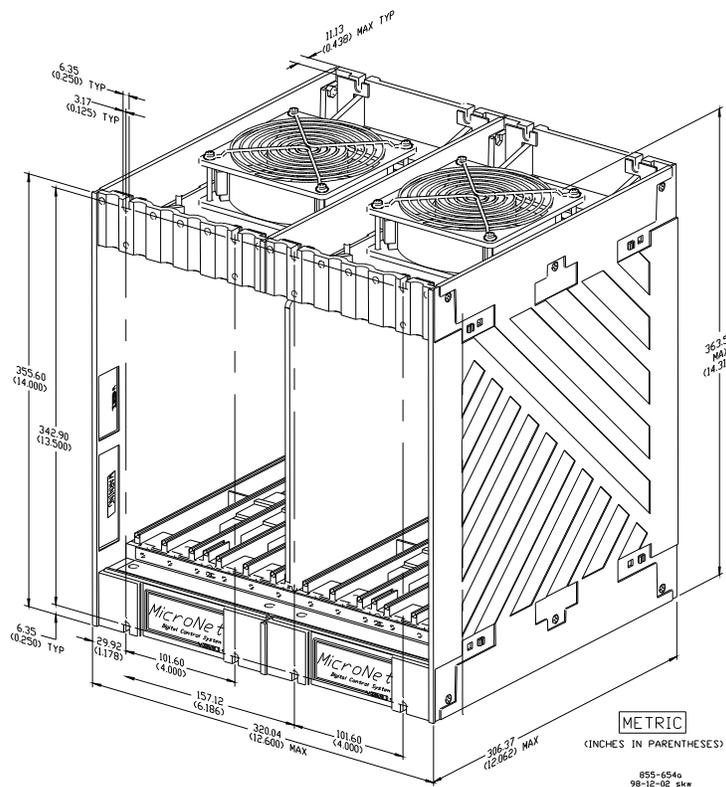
Outline Drawing of MicroNet Plus 8-Slot Chassis
